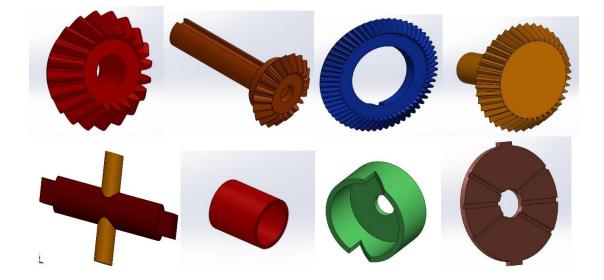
Components of Assembly (1. Crown gear, 2. Side gear,
